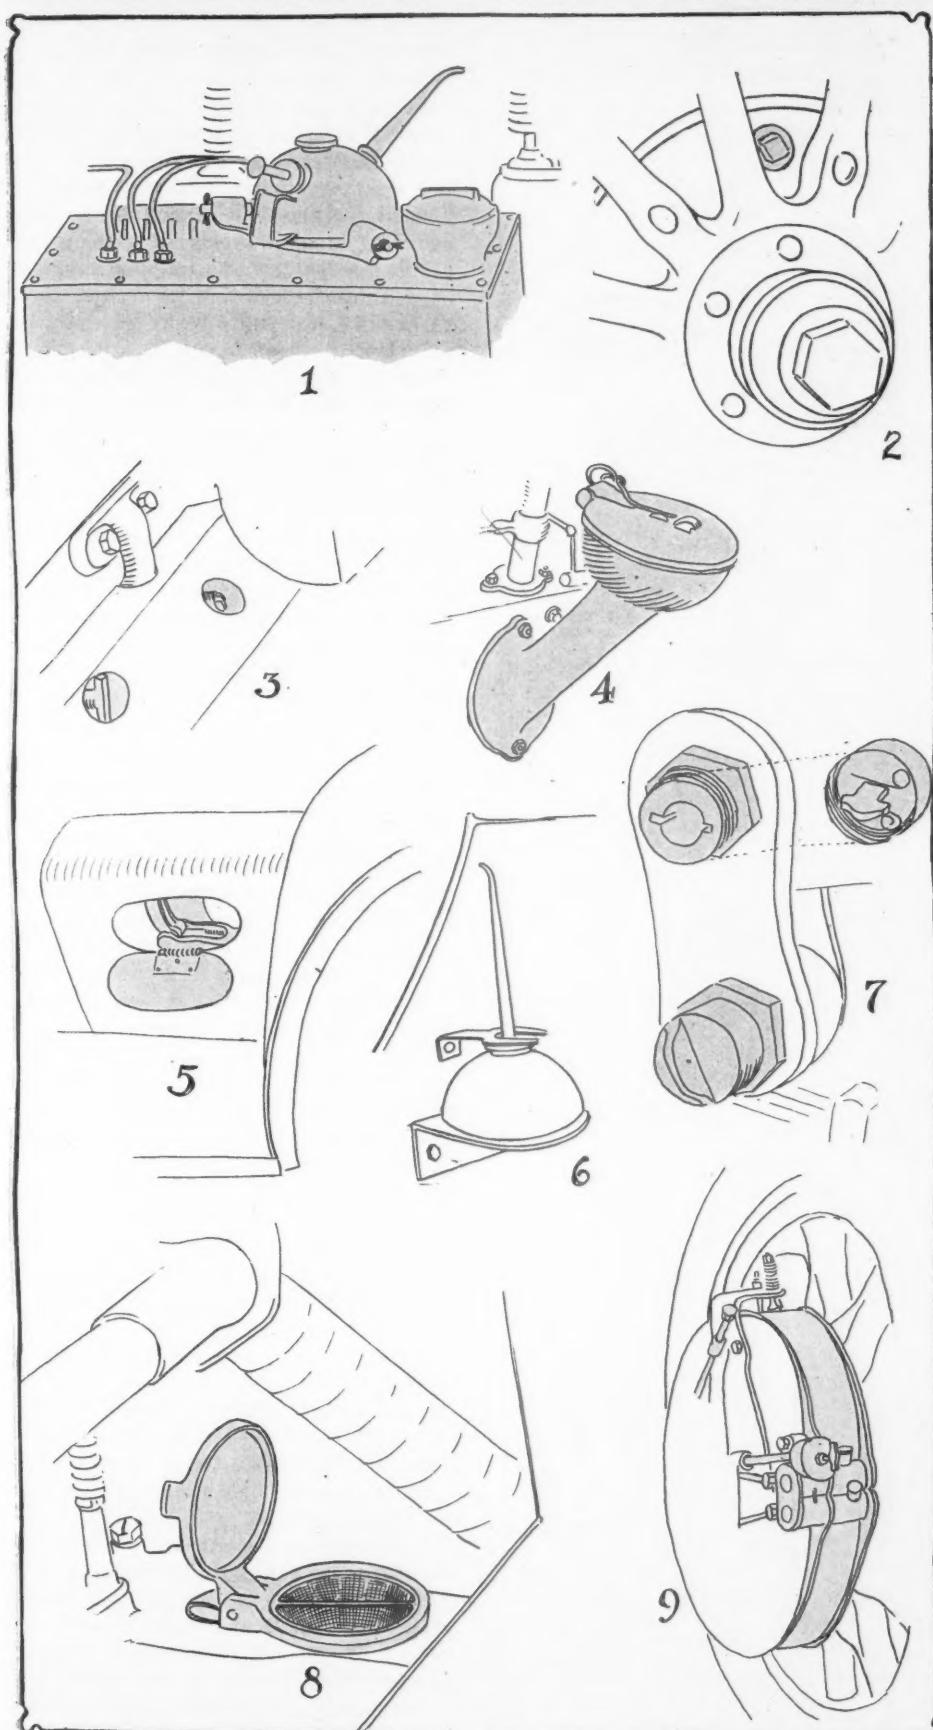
1, THOMAS OILING FACILITIES; 2, TO OIL CADILLAC BRAKE MECHANISMS; 3, TO GET AT LOZIER'S SPRING BOLT OILER; 4, LARGE FILLER CAP ON NATIONAL MOTOR; 5, GET-AT-ABLE HUDSON REAR SPRING SHACKLE; 6, PRIMING OR OIL CAN ON FRANKLIN MOTOR; 7, SPEEDWELL INTEGRAL SHACKLE BOLT GREASE CUPS; 8, PREMIER'S MOTOR OIL FILLER CUP; 9, FEATURES OF PACKARD BRAKE AND BEARING OILING
